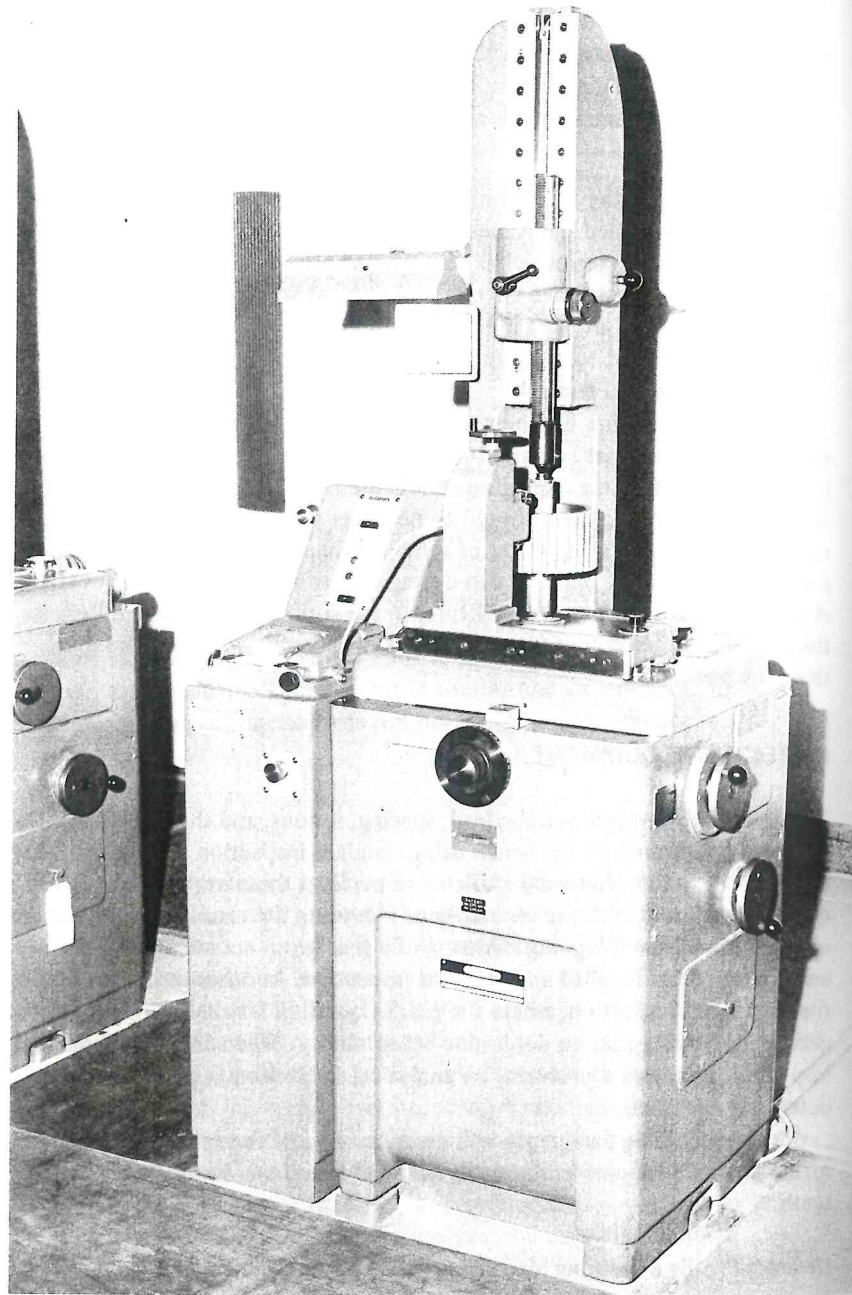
Involute profile measuring machine. (Courtesy of Fellows Corporation, Springfield, Vt.)
